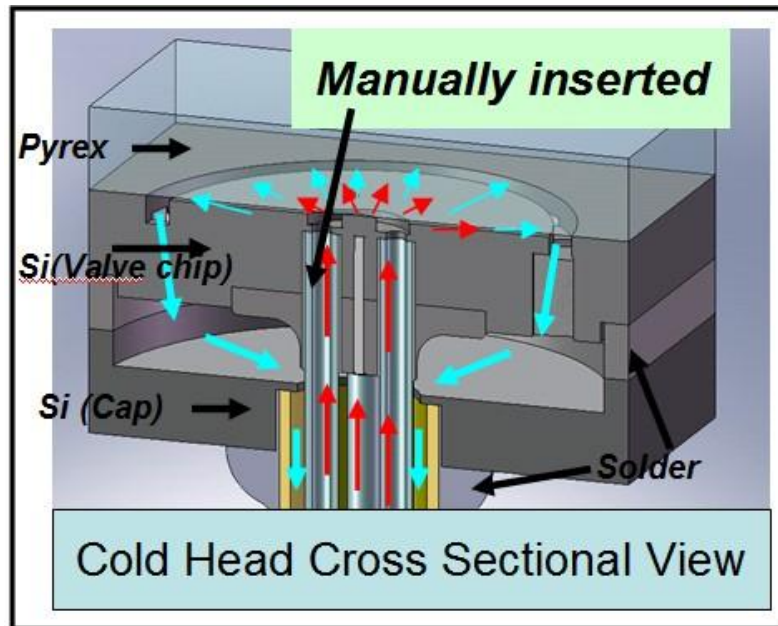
Cross-sectional view of a CU Boulder's cold head with fibers manually inserted into the cold head assembly.
